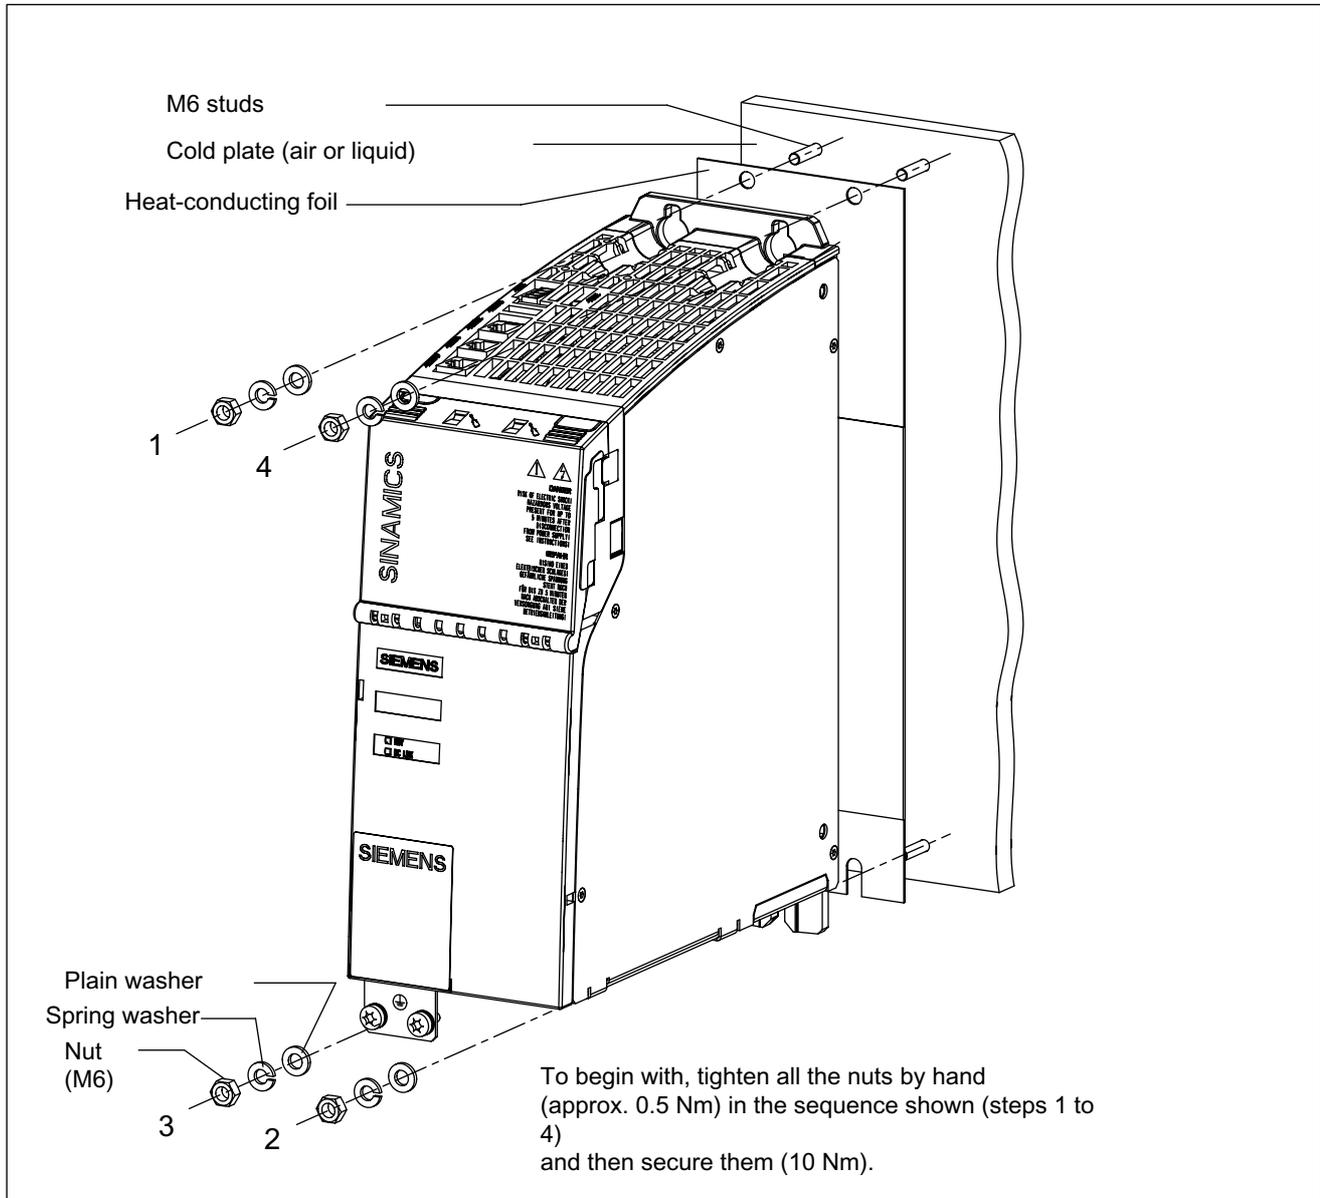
Installation: Smart Line Module Booksize Compact onto a cold plate
